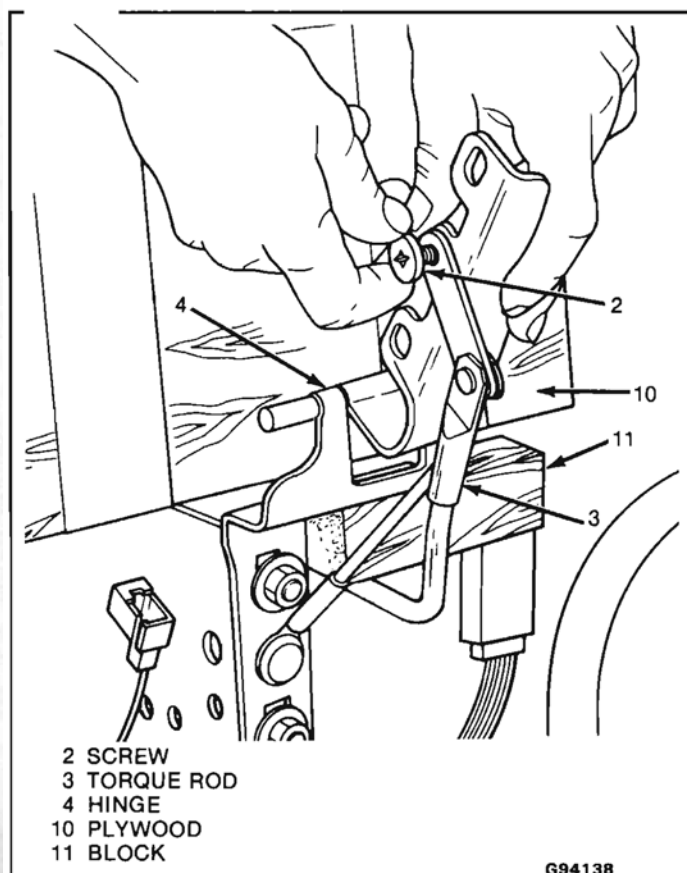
Attaching Rear Compartment Lid Torque Rod
